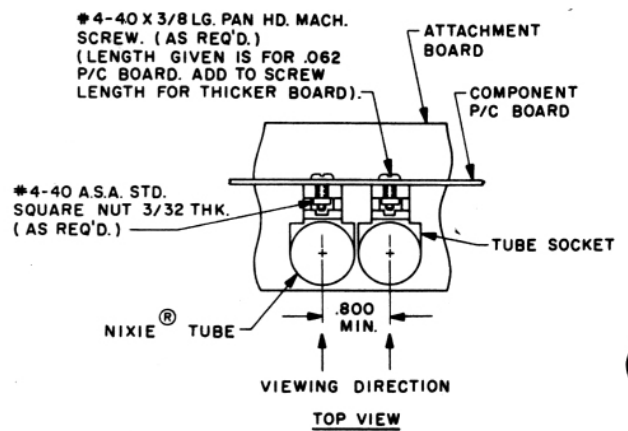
DRIVER MODULE BOARD SERIES MOUNTING
